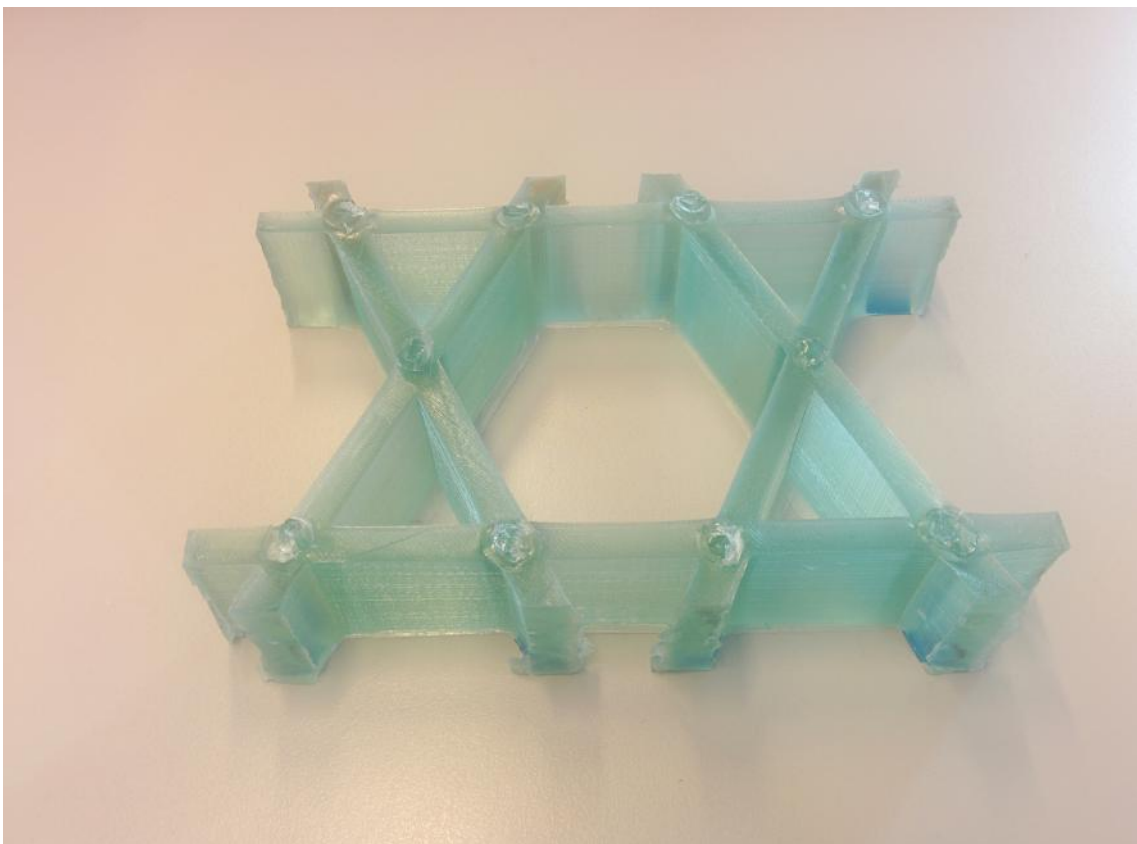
3D printed negative for producing a rubber rib sample mould
